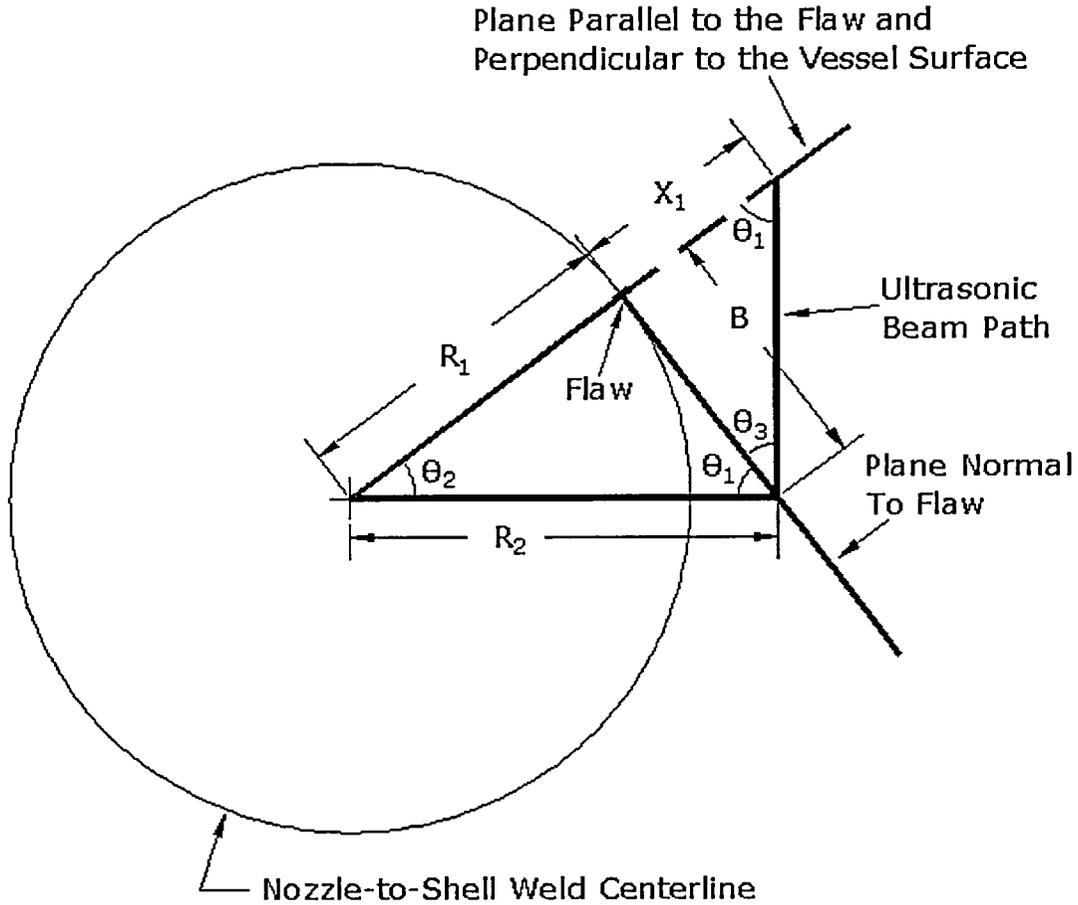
Plan View of the Nozzle-to-Shell Weld Examination Geometry for a Circular Weld in a Flat Plate
